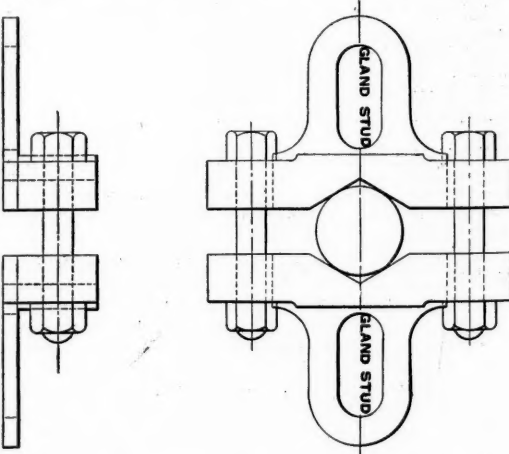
Valve Stem Clamp, Delaware & Hudson Co.
